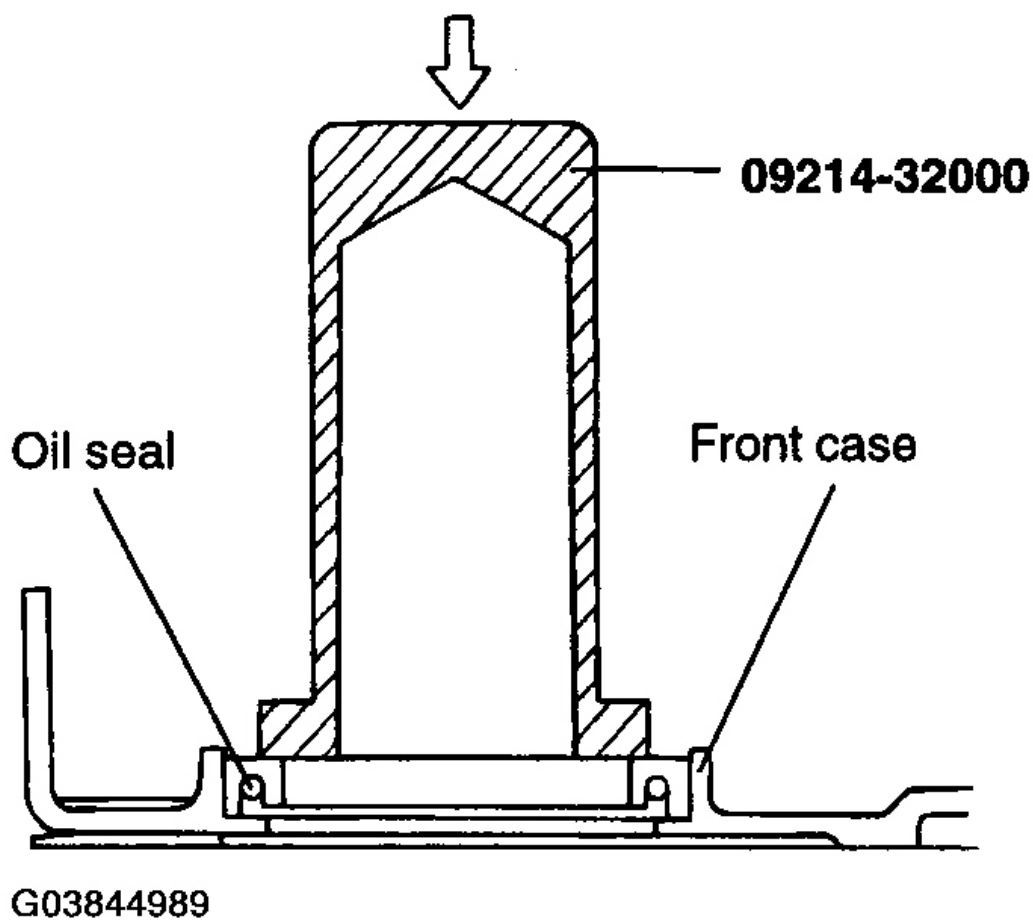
Installing Crankshaft Front Oil Seal Into Front Case
